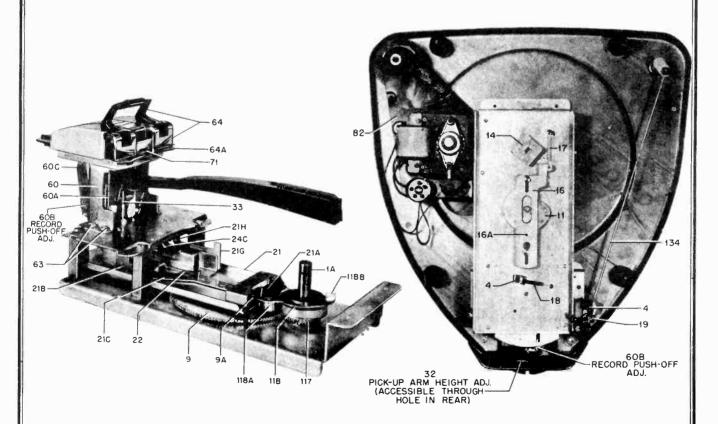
VIEW OF RECORD CHANGER WITH BASE & MOTOR ASSEMBLY REMOVED
